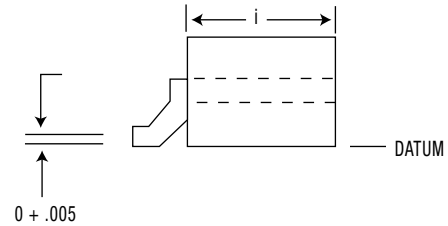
Surface Mount Tolerance for Components with Tabs
